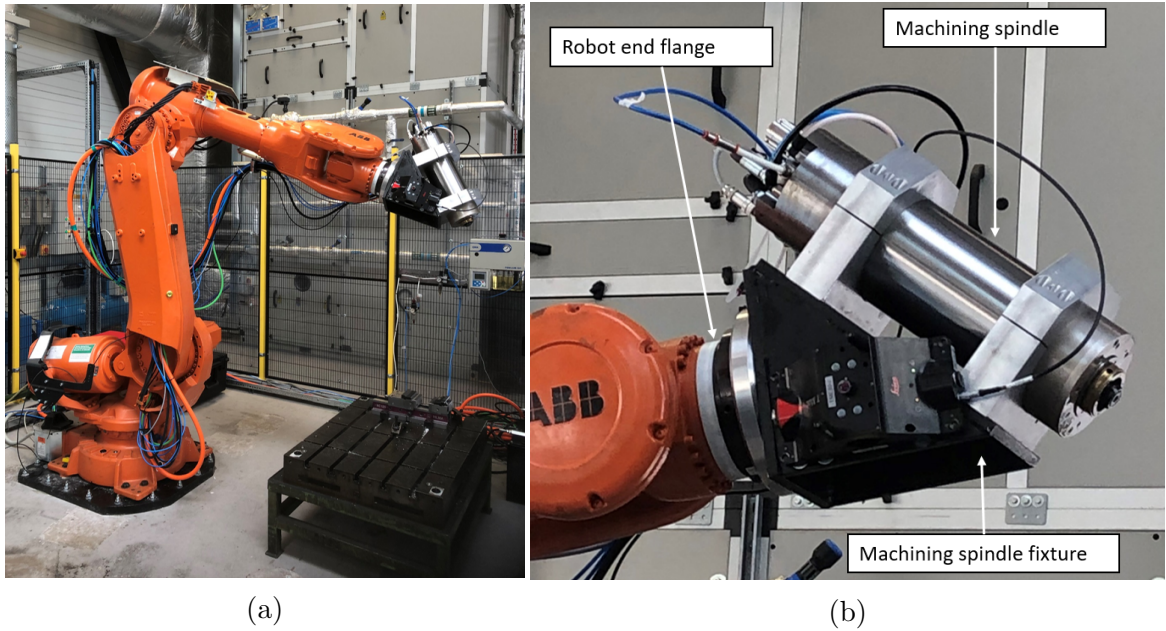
(a) ABB IRB6640 robot, (b) Machining spindle and fixture static payload
